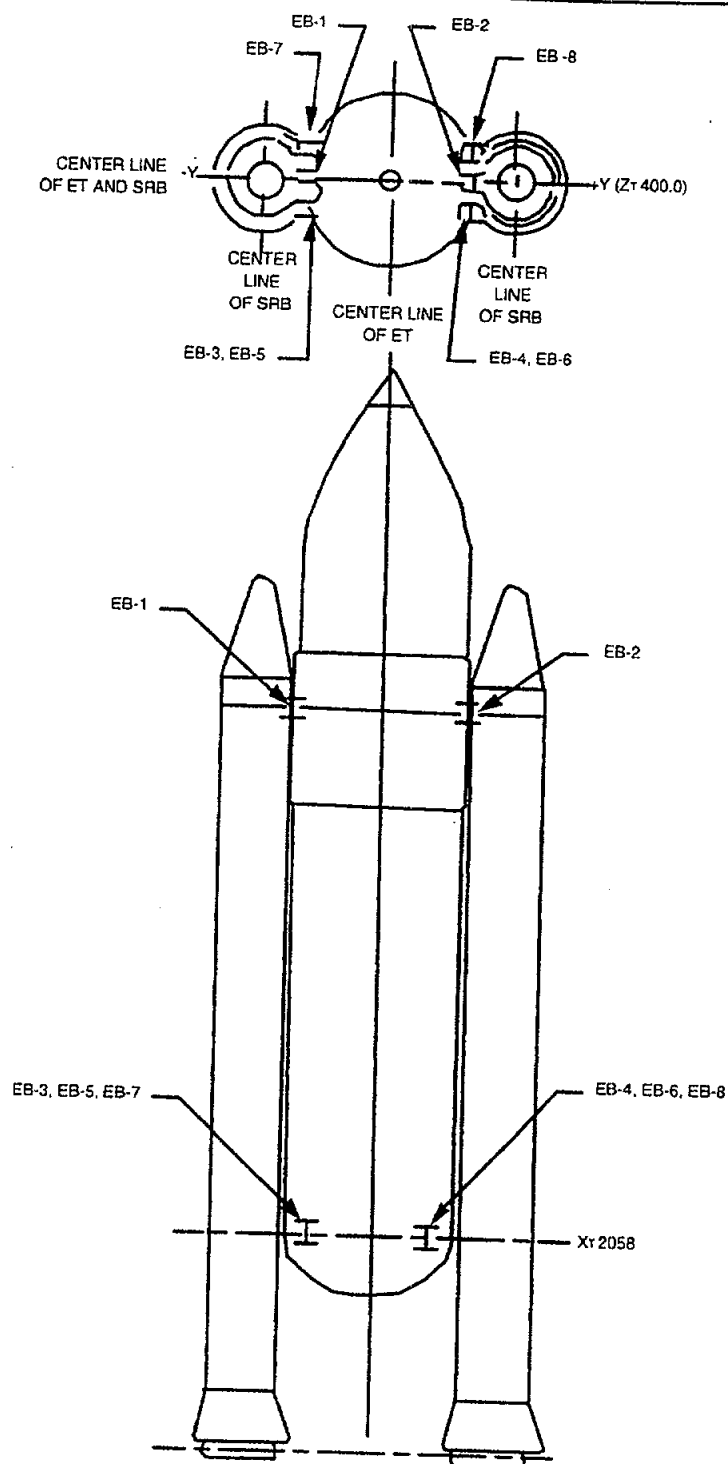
ET ATTACH POINTS (SHEET 1 OF 2) (FOR REFERENCE ONLY)
